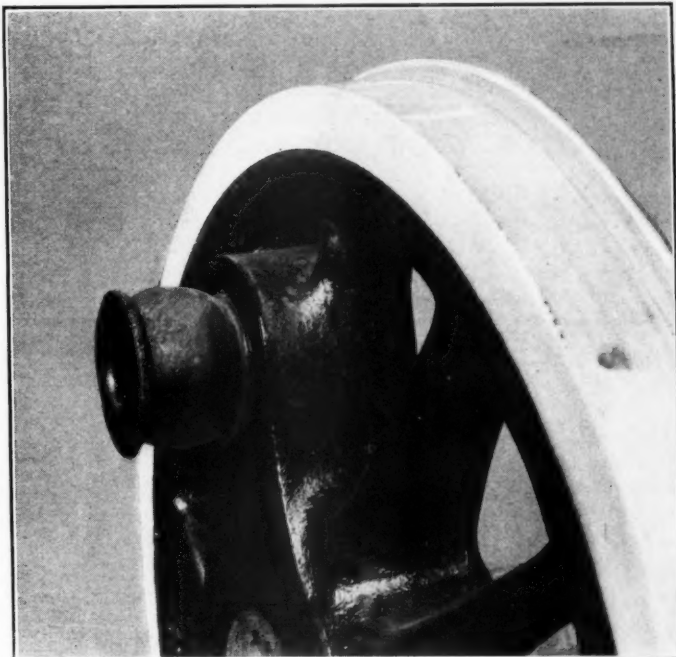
Ball Bearing Front Crank Pin, 2-10-2 Class
